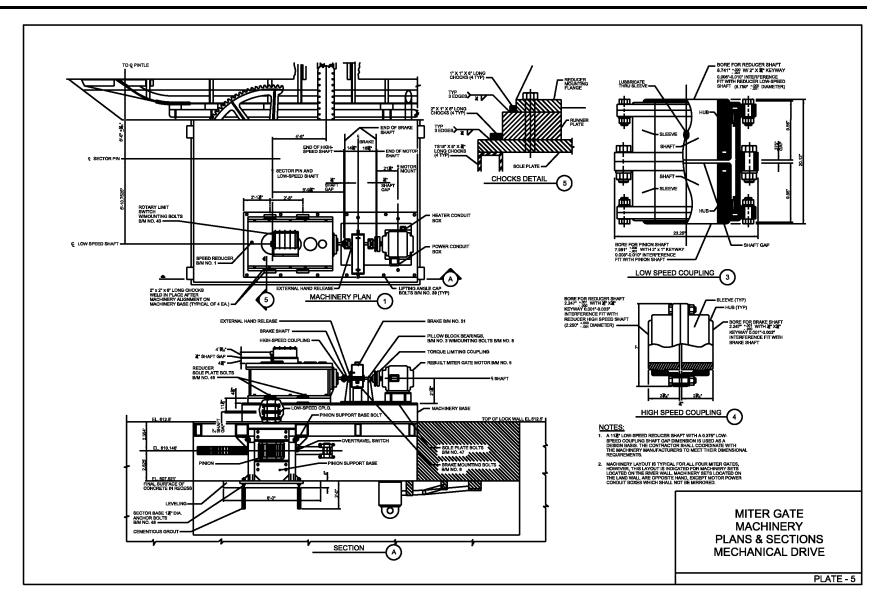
Plate 5: Miter gate machinery plans and sections – mechanical drive
